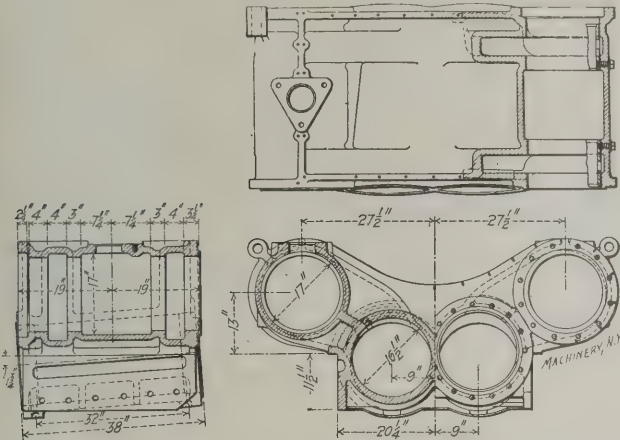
Cross-section of High-pressure Cylinder and Valve Chamber.
